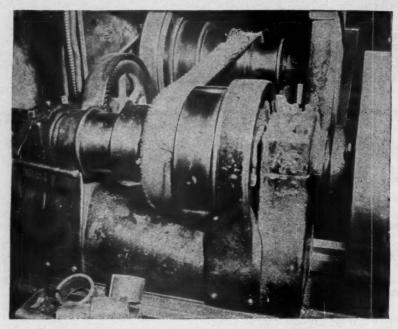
Front view of belt connection between jack shaft and lathe pulley—only mechanical connection between drive and lathe.
